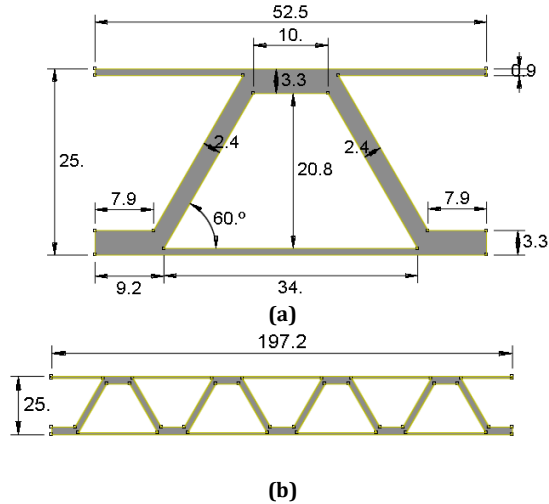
Base model cross-section dimensions of (3-8-3) specimens without reinforcement sheet, (a) longitudinal specimens and (b) transverse specimens.
